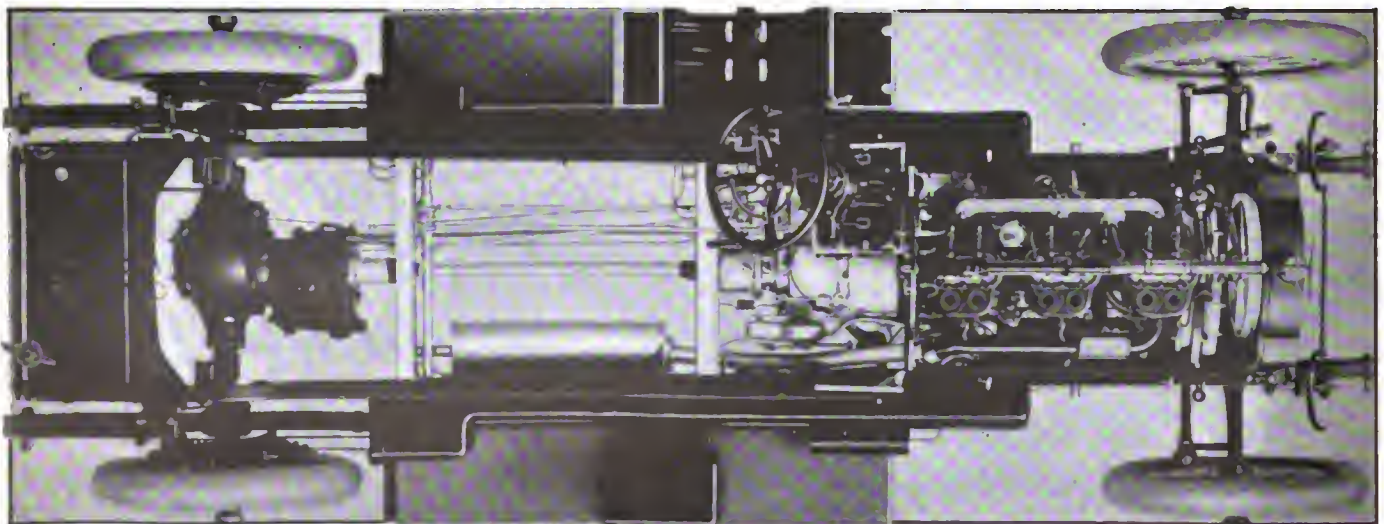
Plan view of the new Packard 48 chassis, showing mounting of drive and torque members
